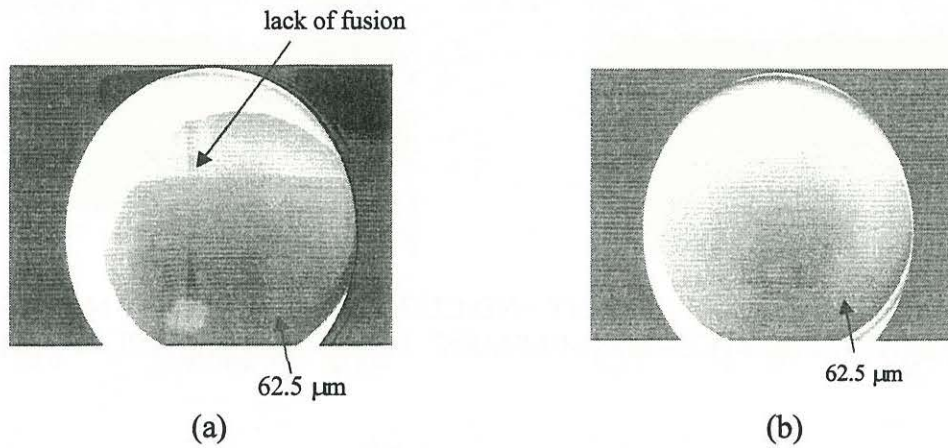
X-RAY INSPECTION OF ZIRCALOY-4 FUEL ELEMENT WELD AREA WELDED BY Nd:YAG LASER (a) LACK OF FUSION, (b) NO DEFECT
